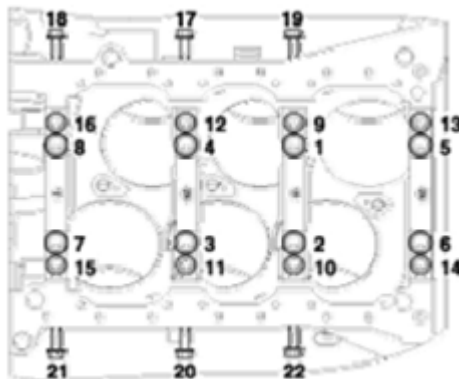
Identifying Main Bearing Cap Bolt Tightening Sequence
